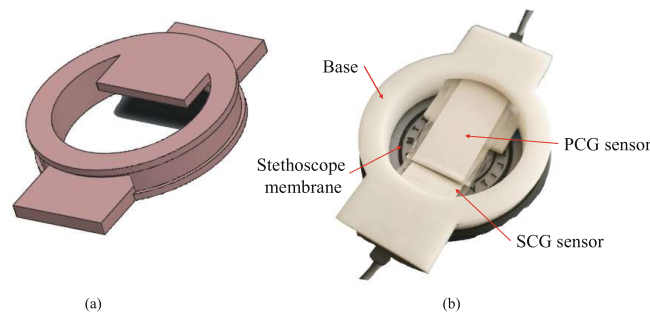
Sensor coupling: (a) SolidWorks design, (b) 3D printed prototype.
